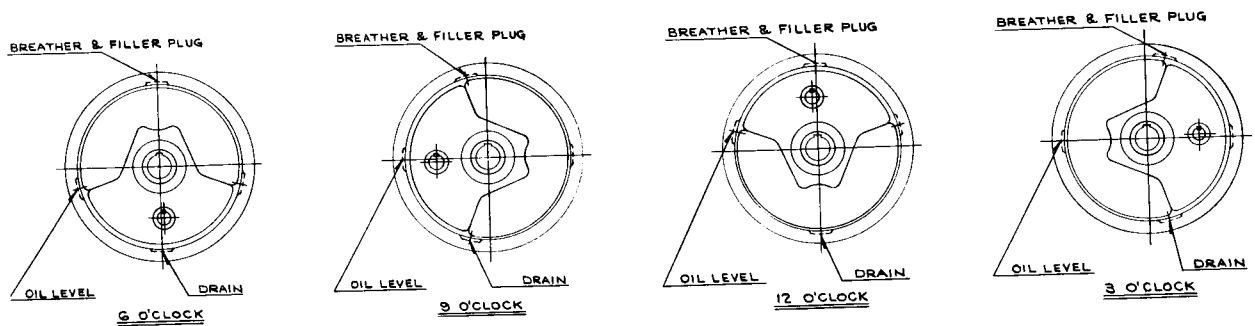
Shaft Mounted Units - Breathers, Oil Level, Drain Locations (Standard)
